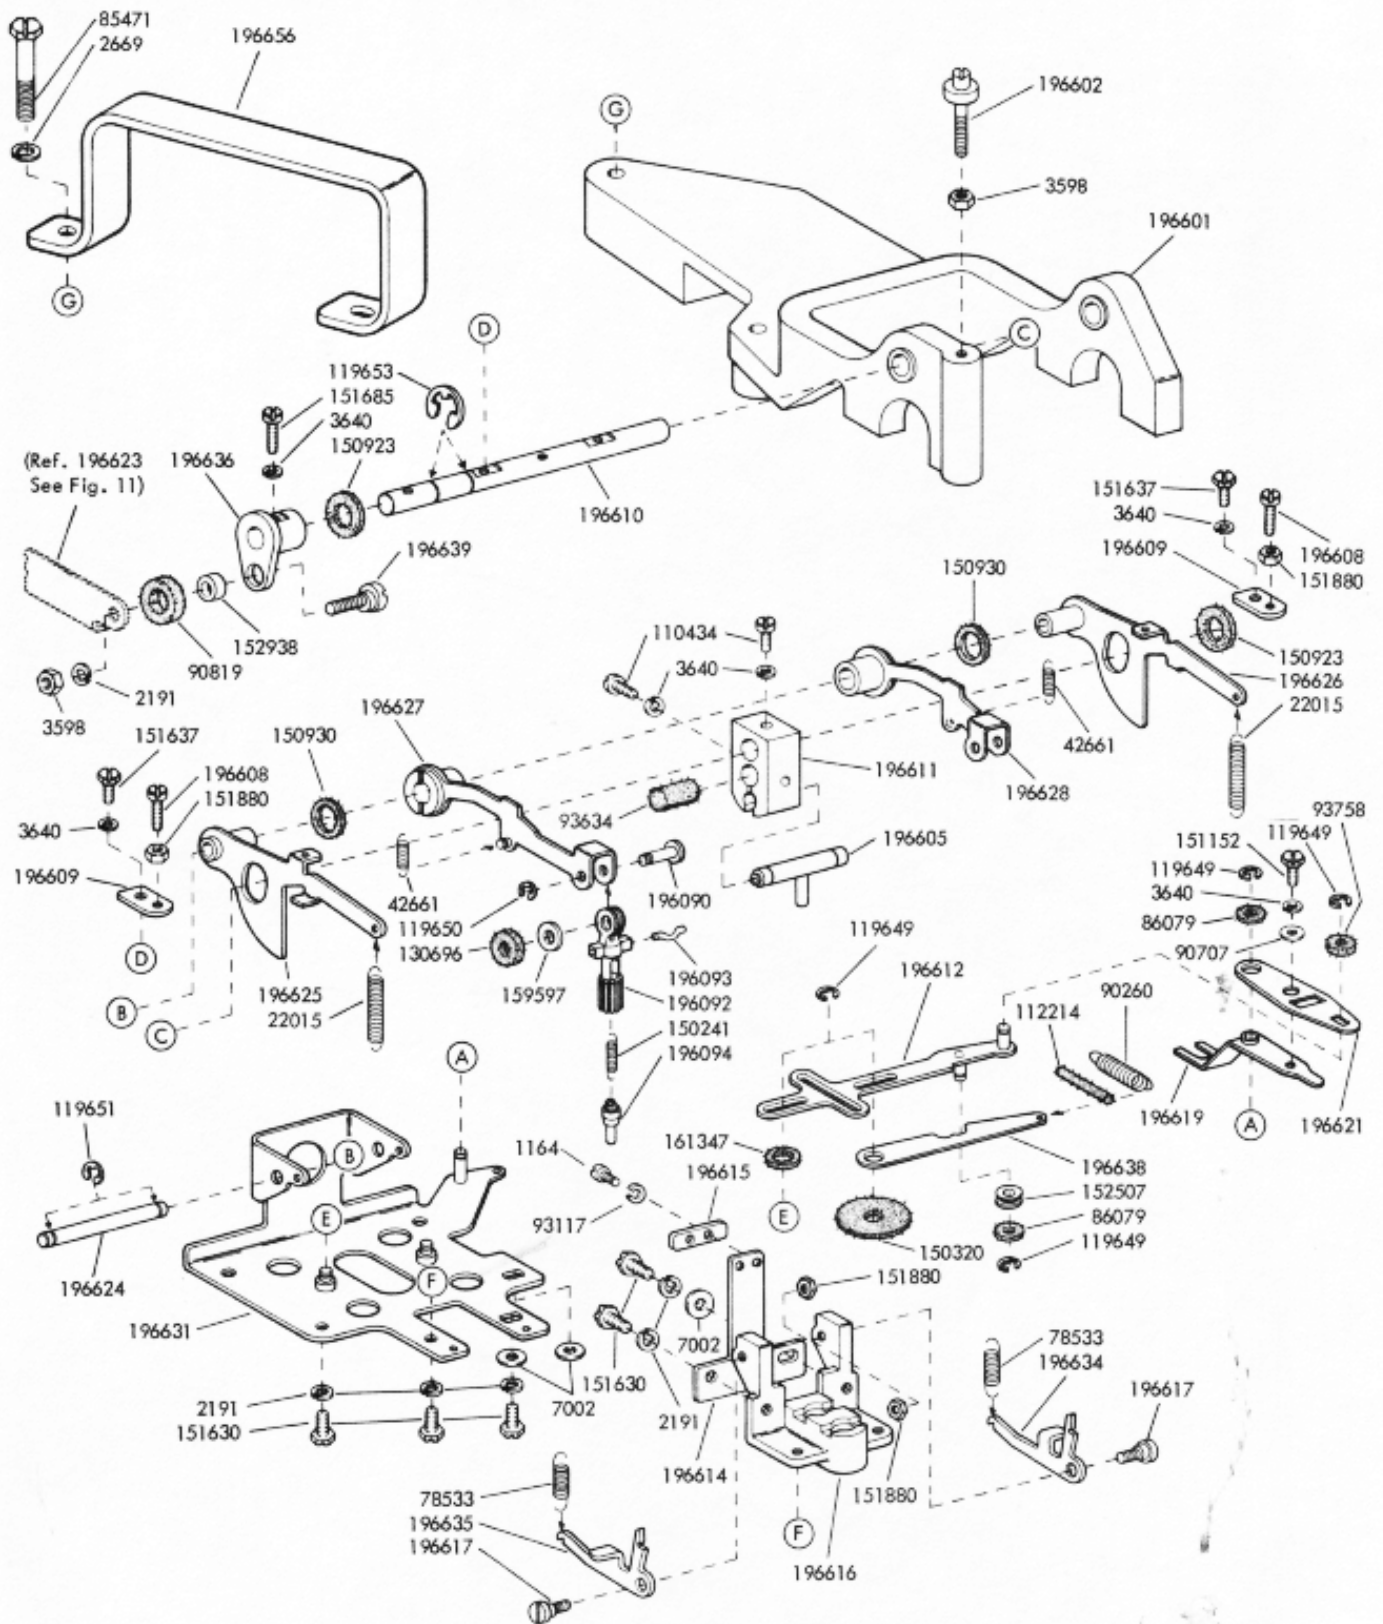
DOUBLE PRINT HAMMER MECHANISM
